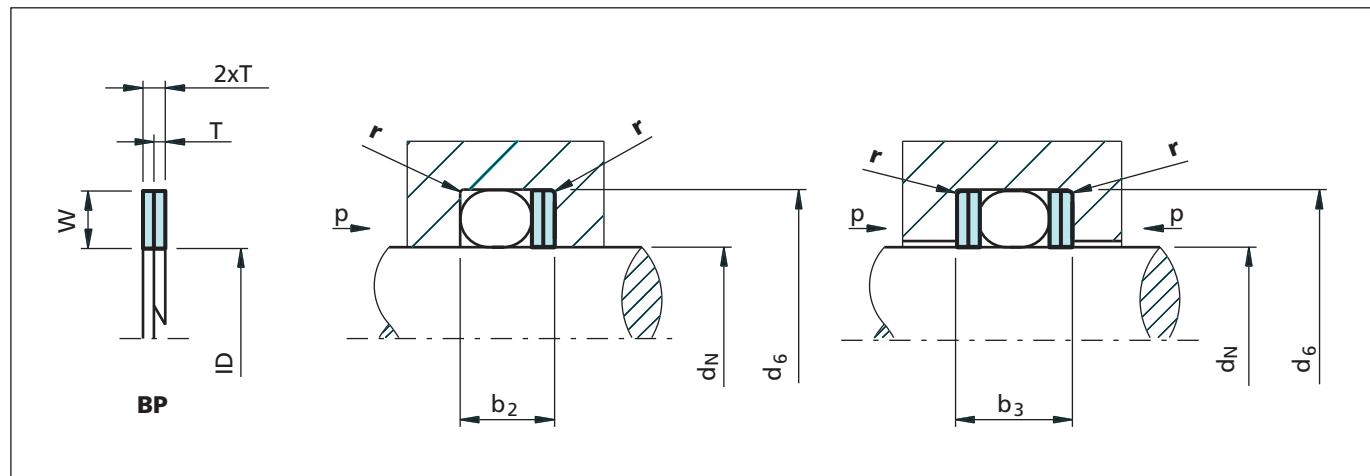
Installation drawing internal sealing, spiral Back-up Ring type
